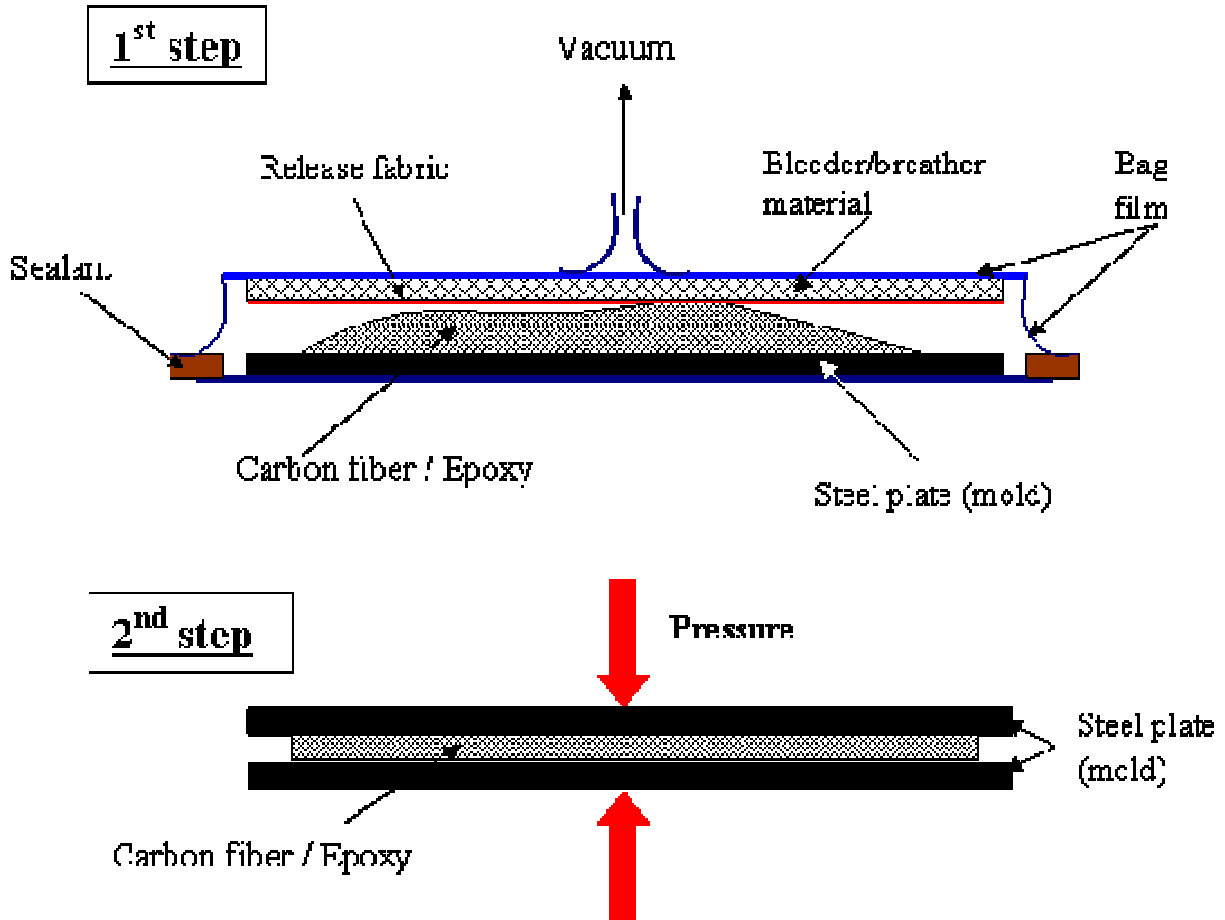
Vacuum Bagging Technique for Making Carbon Fiber/Epoxy Composites
